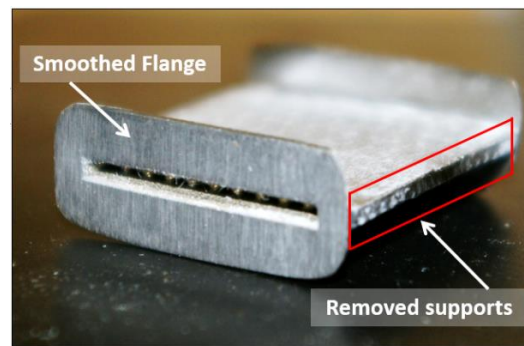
Picture of L-PBF coupon showing smoothed flange and all support structures removed.
